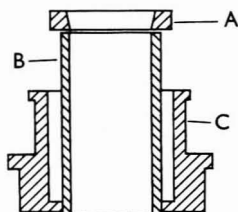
Section of casting ring (A), tube (B) and sample holder (C)
